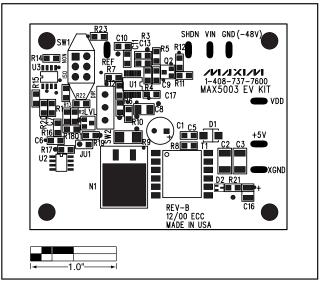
MAX5003 EV Kit Component Placement Guide—Component Side
